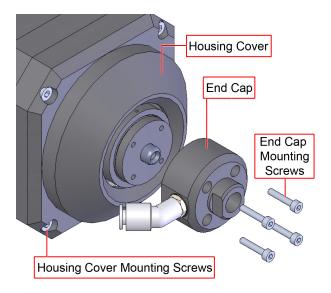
Rear Carriage Cover w/ Wet Cut Rotary Union
